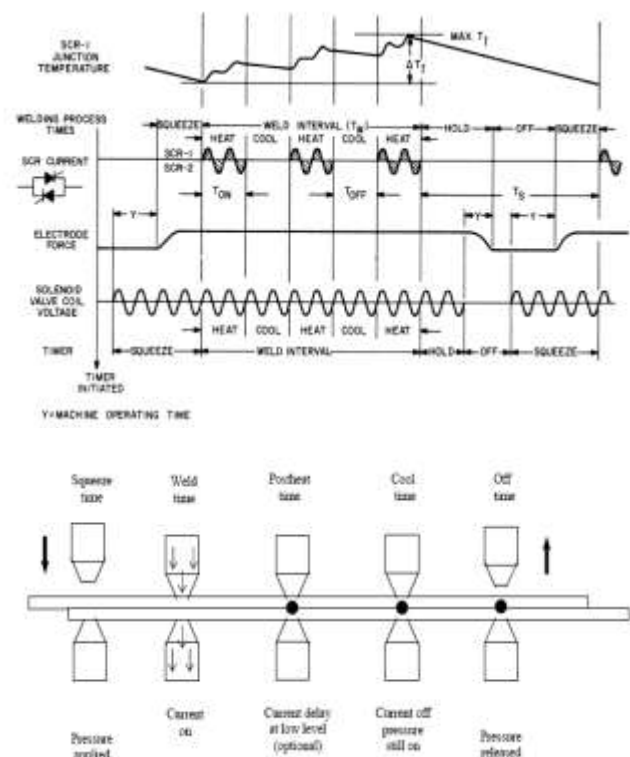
Different time Phases of Spot Welding cycle and the weld cycle of the welding process
